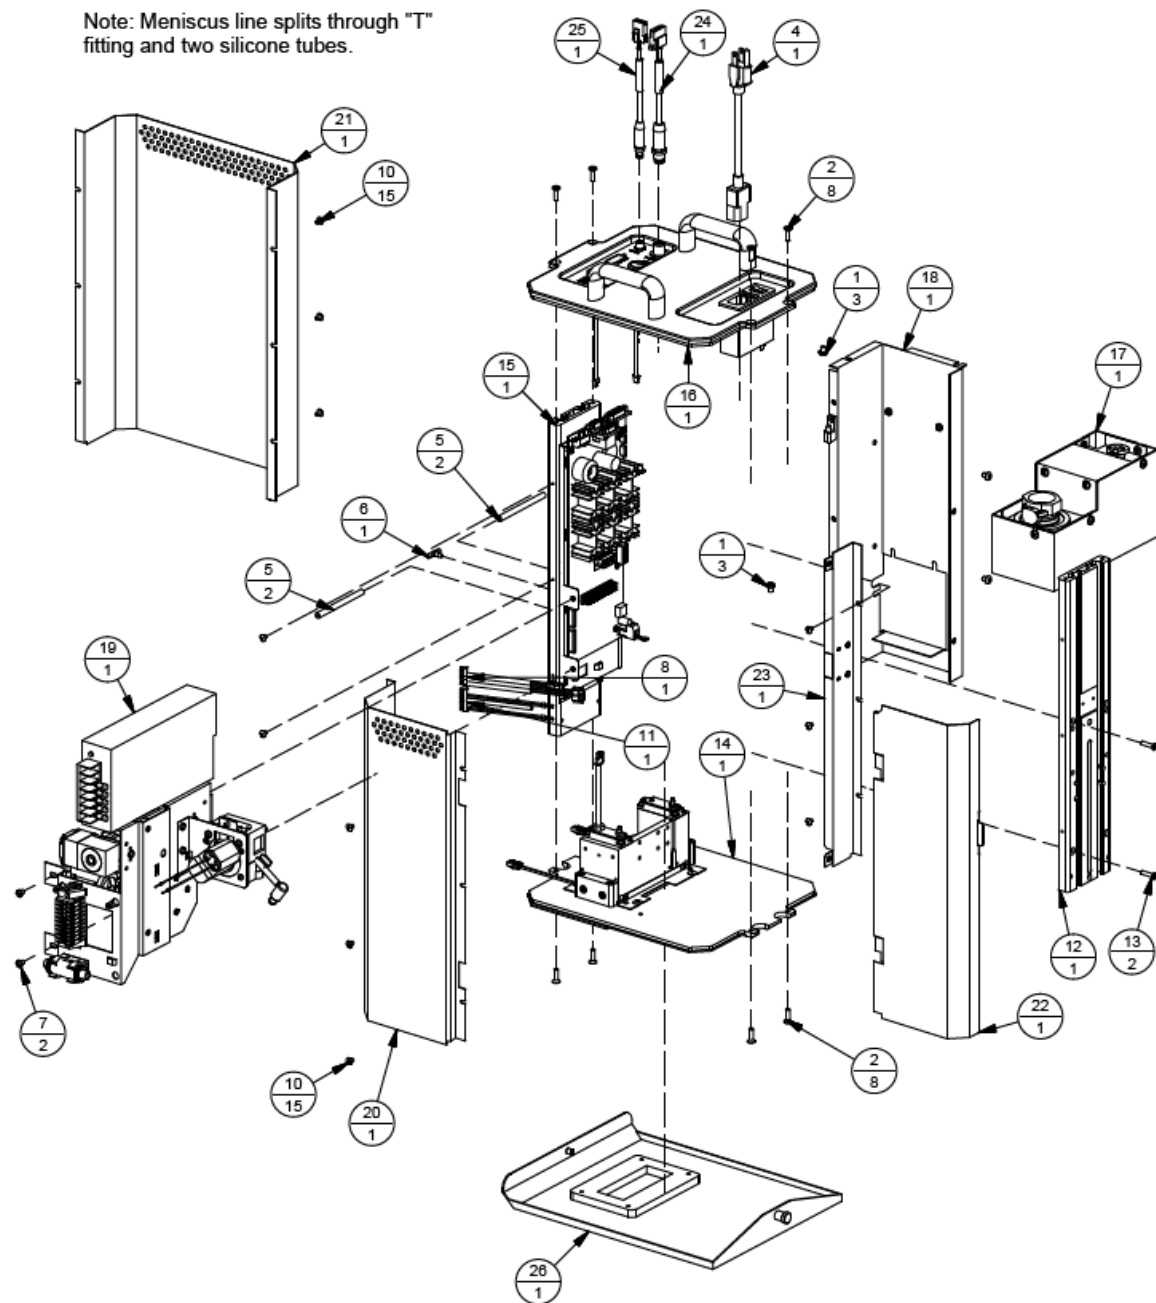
BK2500-AT – Atom Head Assembly, BK2500
